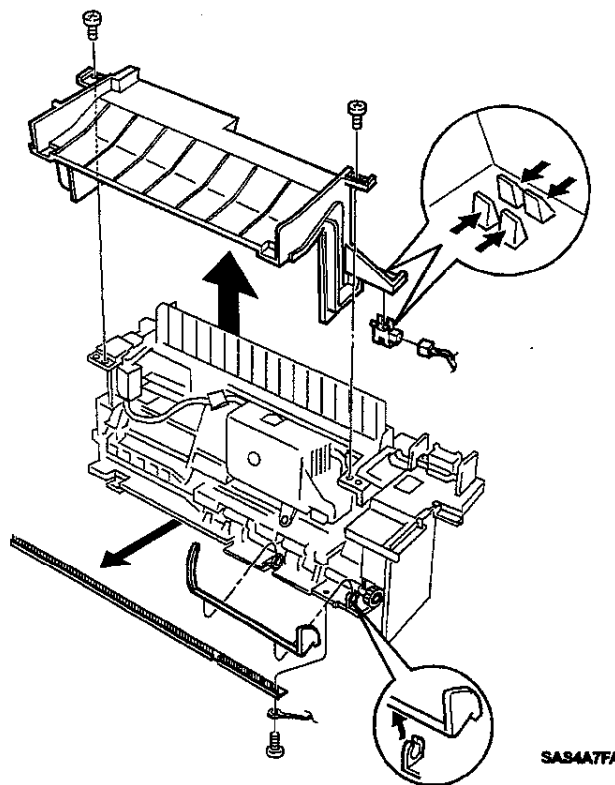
Removing the Lower Chute/Full Stack Sensor/Full Stack Actuator
